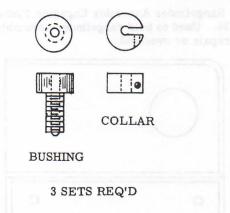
A. SLEEVE BUSHING AND DEPTH COLLAR (SET) ST-6641
